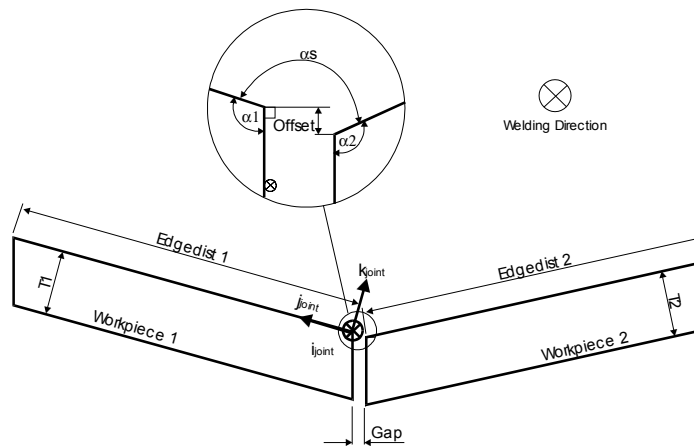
Flank-joint and corresponding geometric workpiece parameters.
